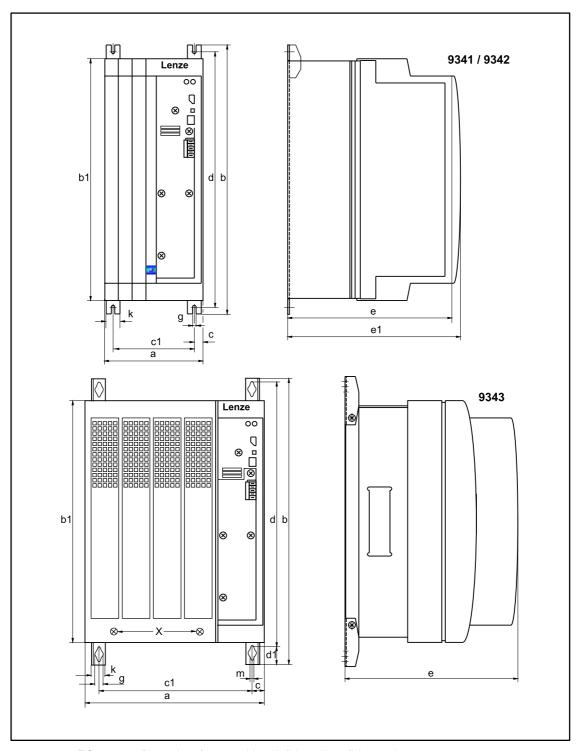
Dimensions for assembly with fixing rails or fixing angles
